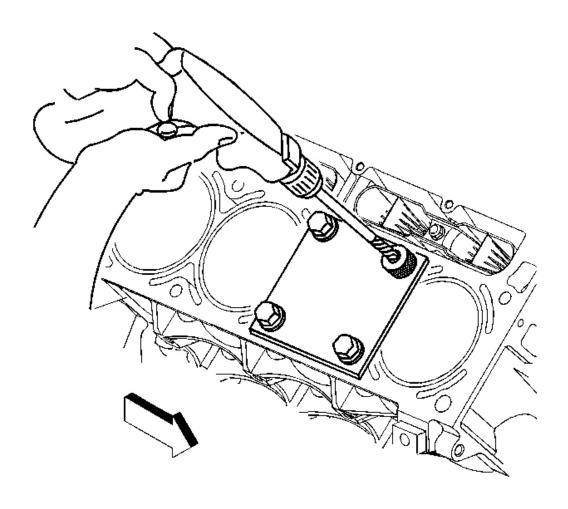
Drilling Cylinder Head Bolt Hole Courtesy of GENERAL MOTORS CORP.
